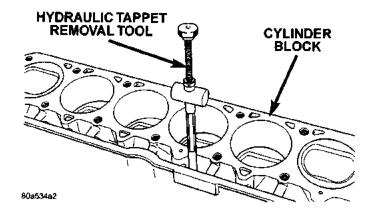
Hydraulic Valve Tappet Removal— Installation Tool
